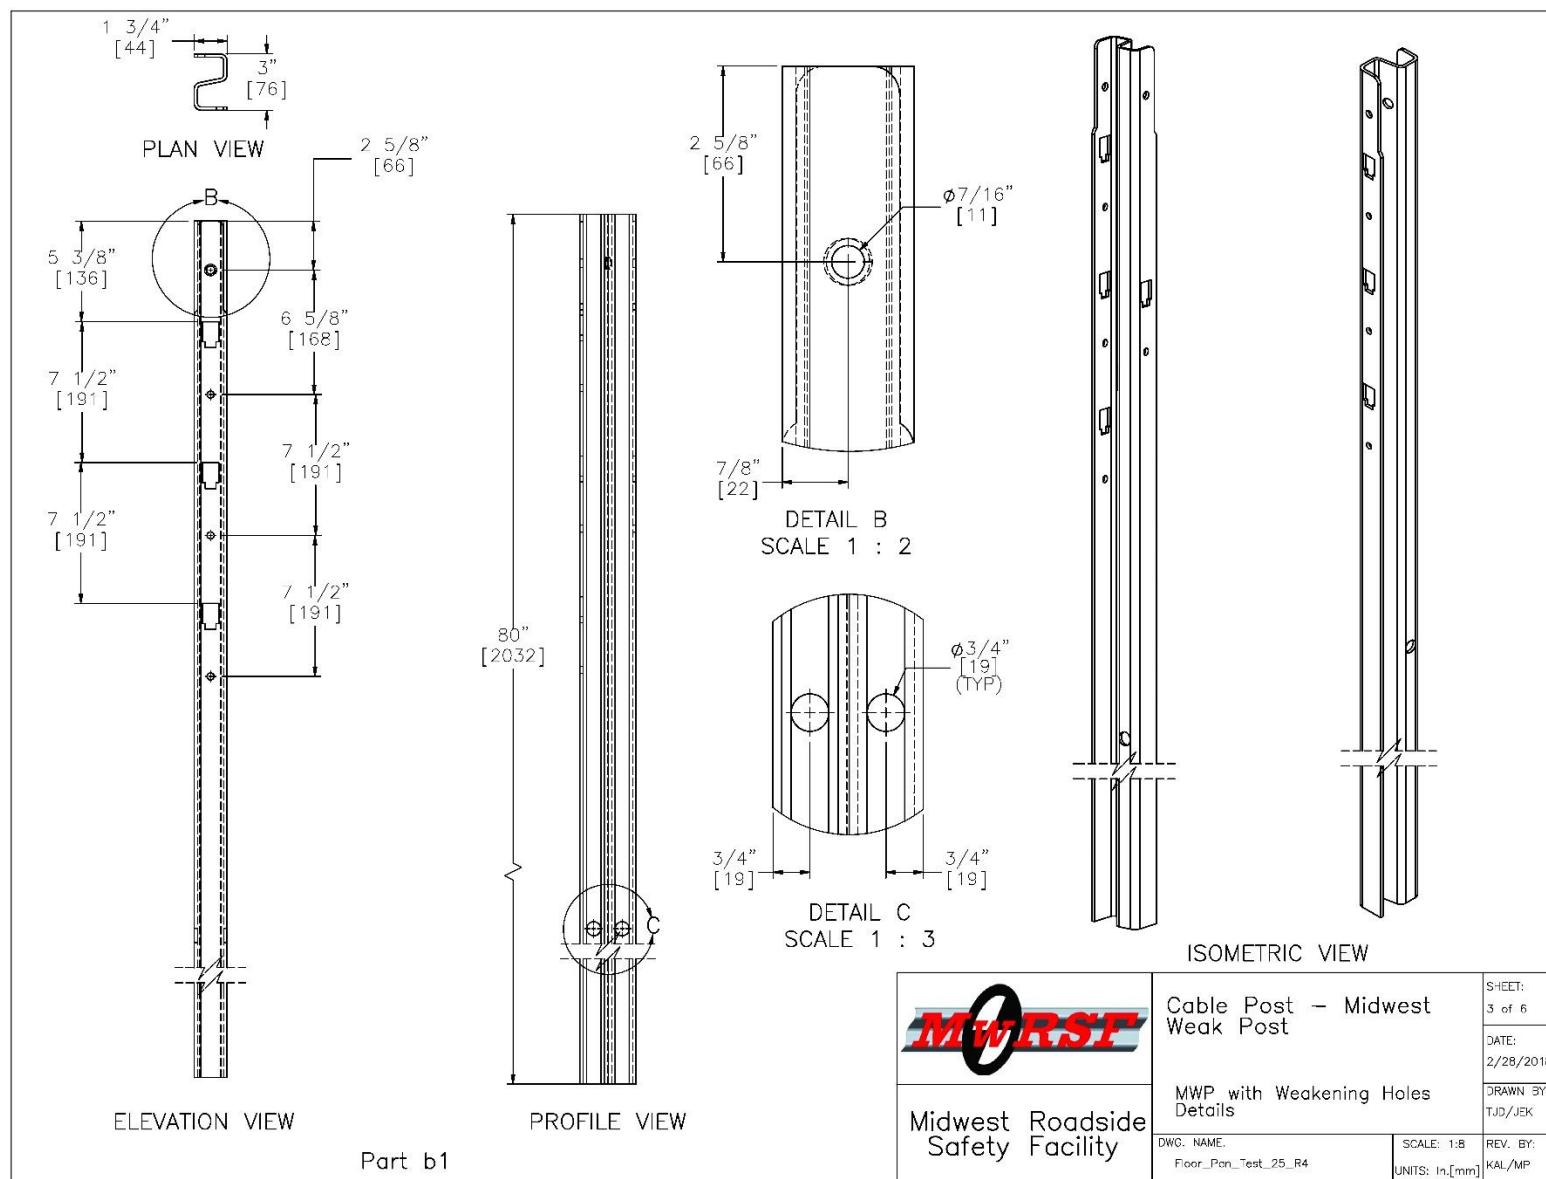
MWP with Weakening Holes Details, Test No. MWFP-25
